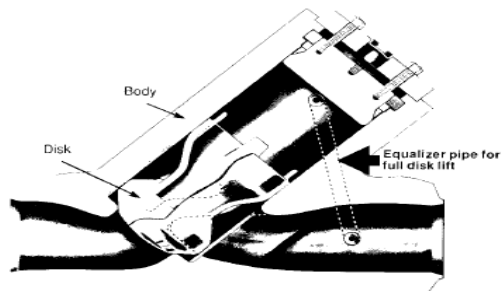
Wye-pattern lift check valve. (Courtesy, BTR Inc./Edward Valve)
